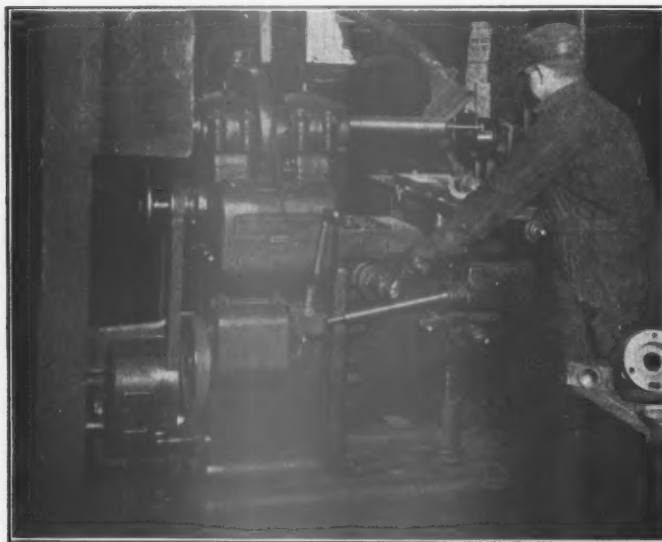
A Heald Internal Grinder May Be Used for Finishing Small External Surfaces—the Job Shown is a Link Trunion
